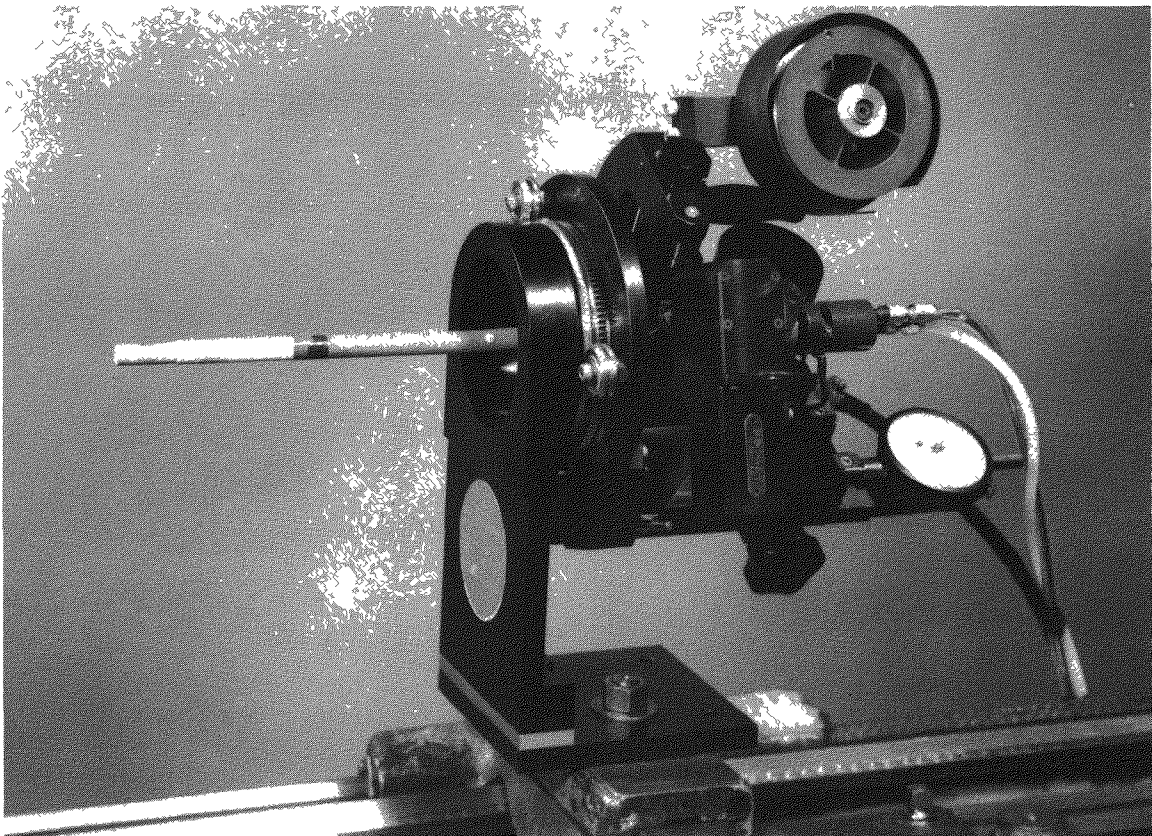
The internal bore welding head for the development program consists of a welding torch with automatic voltage control wire feeder, and a head rotating mechanism.
